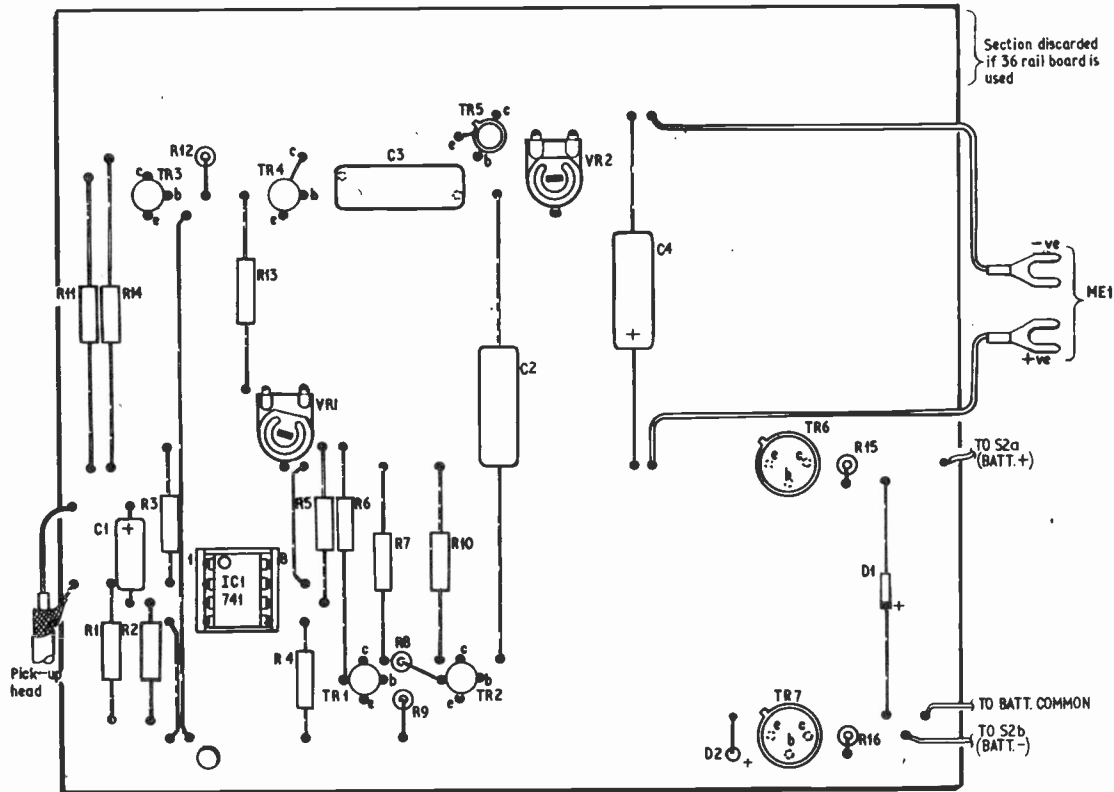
Veroboard cutting and component layout for the marine speedometer of Fig. 2
